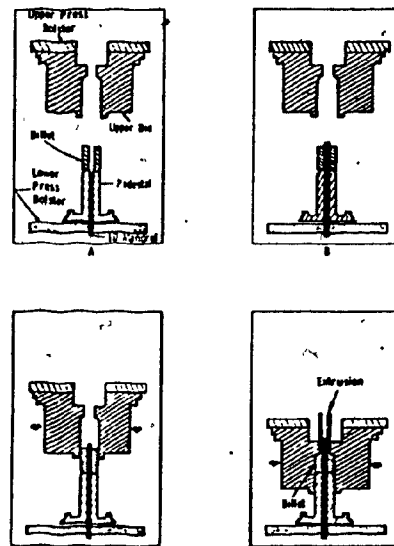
Sequence utilized in conjunction with 20,000 ton press to fabricate extruded hollow.
